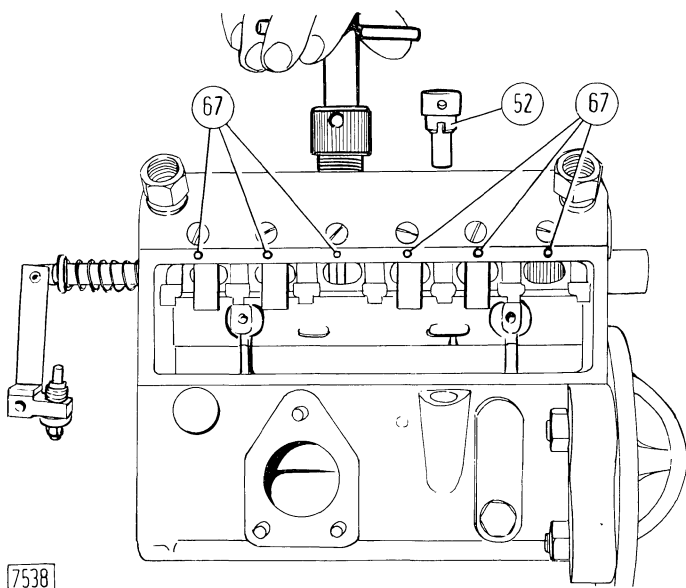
Redressing the Barrel Seats using cutter A. 94021 (290971)
